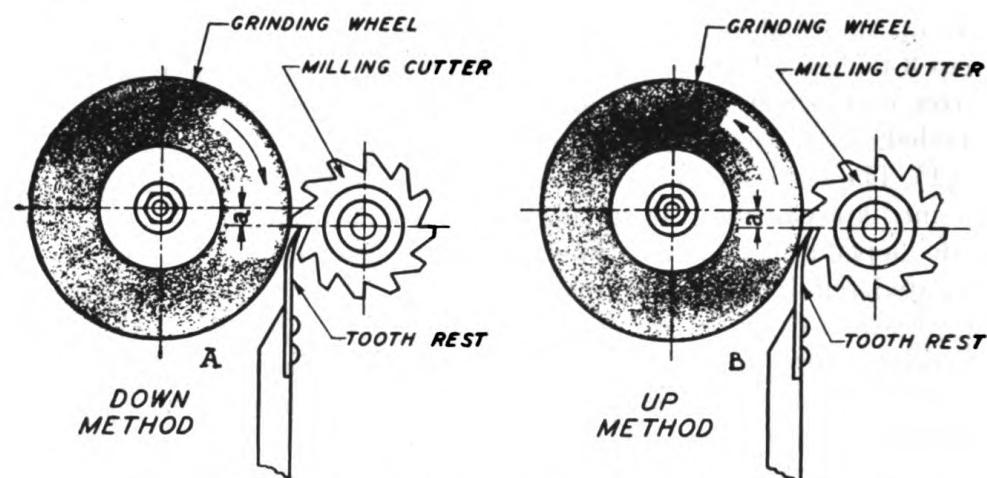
Direction of wheel rotation for grinding milling cutters.
